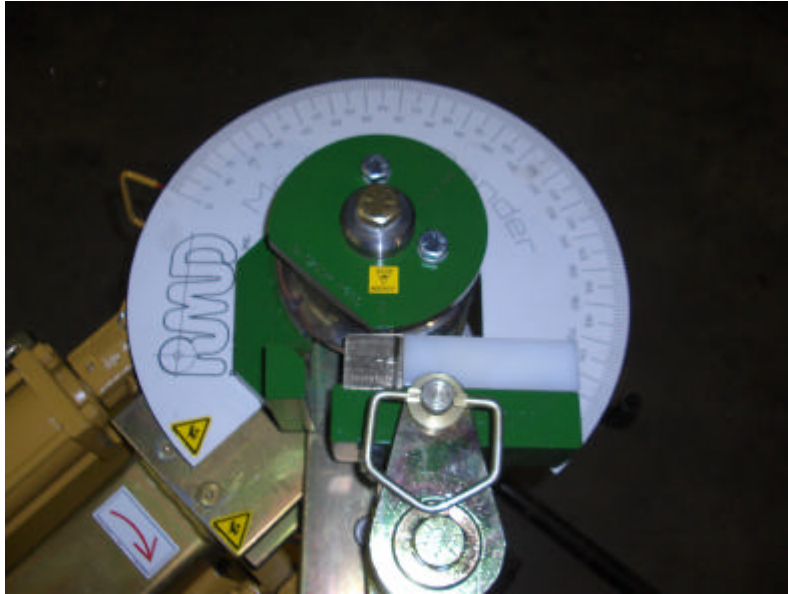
Correct counter die position (Approximately 1/8" (3mm) away)
